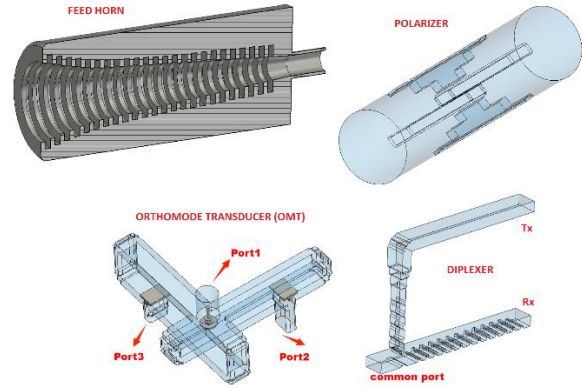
Feed Horn and Backend Feed Component Electrical Design
